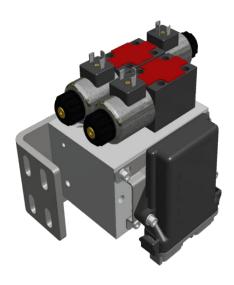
MANIFOLD BRACKET WITH A MANIFOLD AND HURAILIC DRIVE UNIT MOUNTED
